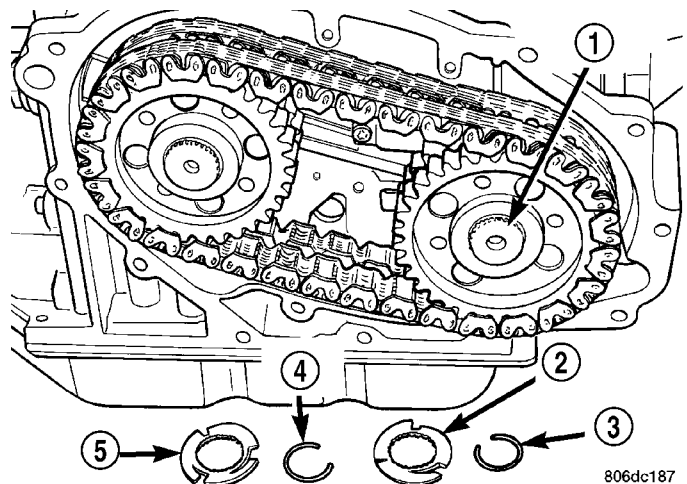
Install Transfer Shaft Sprocket Snap Ring and Wave Washer
